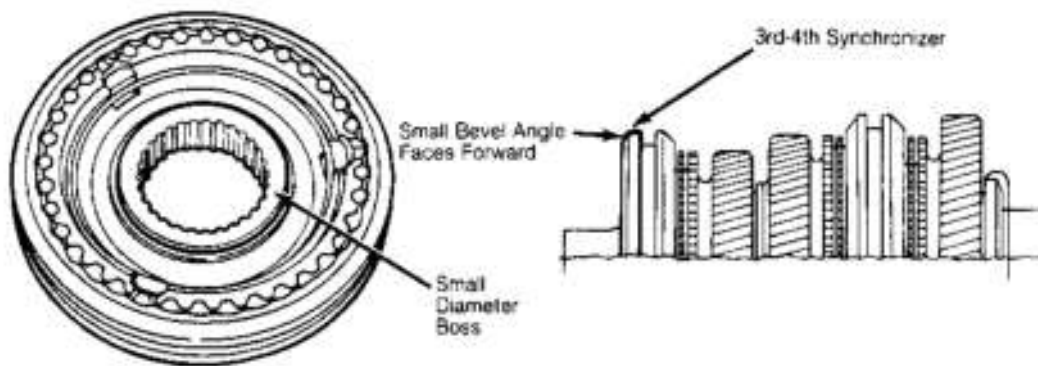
Installing 1st-2nd/3rd-4th/OD-Reverse Synchronizer Assemblies Onto Mainshaft
